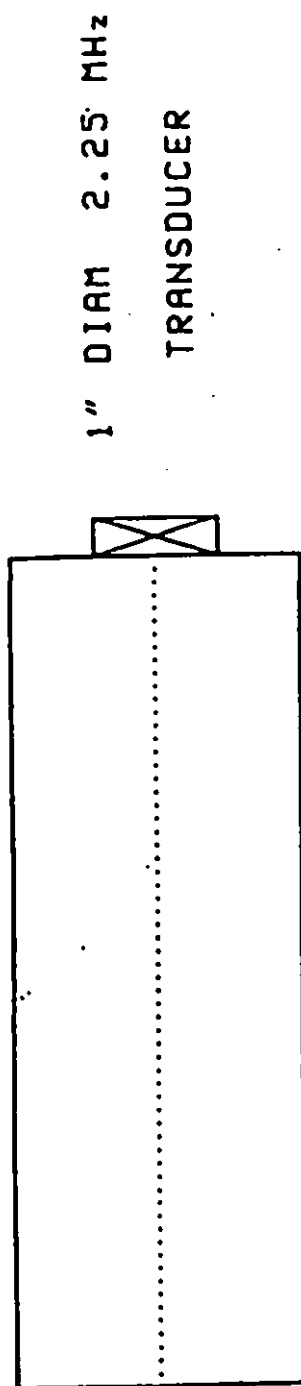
Longitudinal end scan inspection technique for large bar, rod and forgings.
